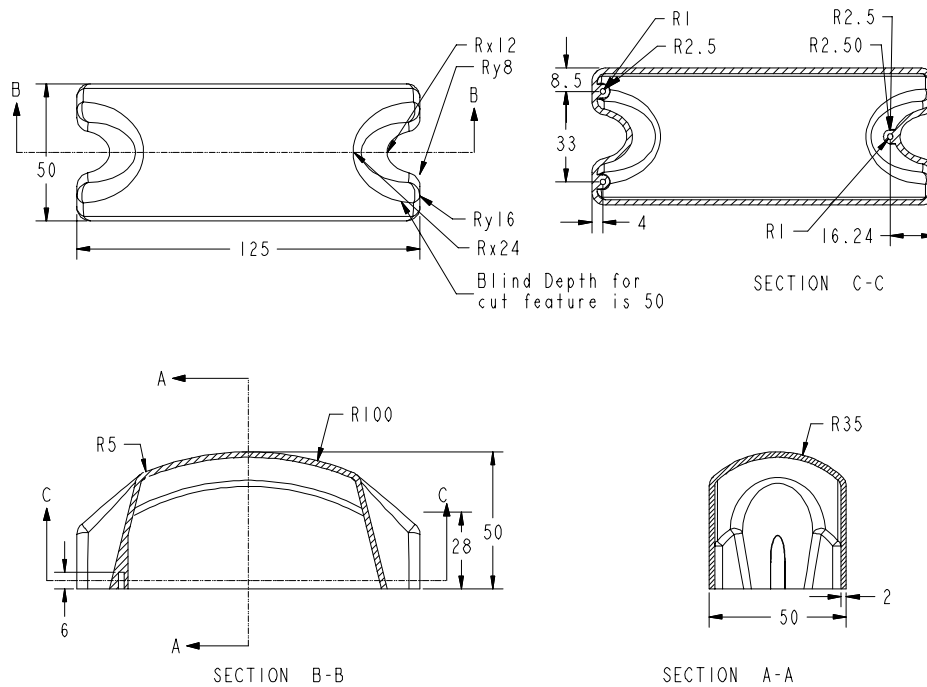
Top view, sectioned front view, sectioned right-side view, and sectioned bottom view of the carburettor cover
